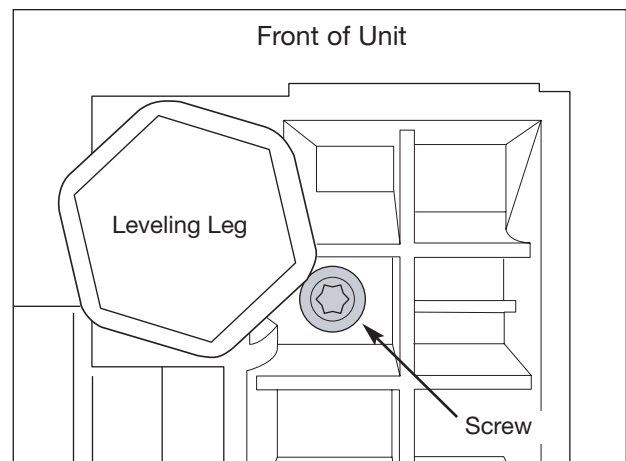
Leg and Hinge Assembly Removal Bottom Screw Location
